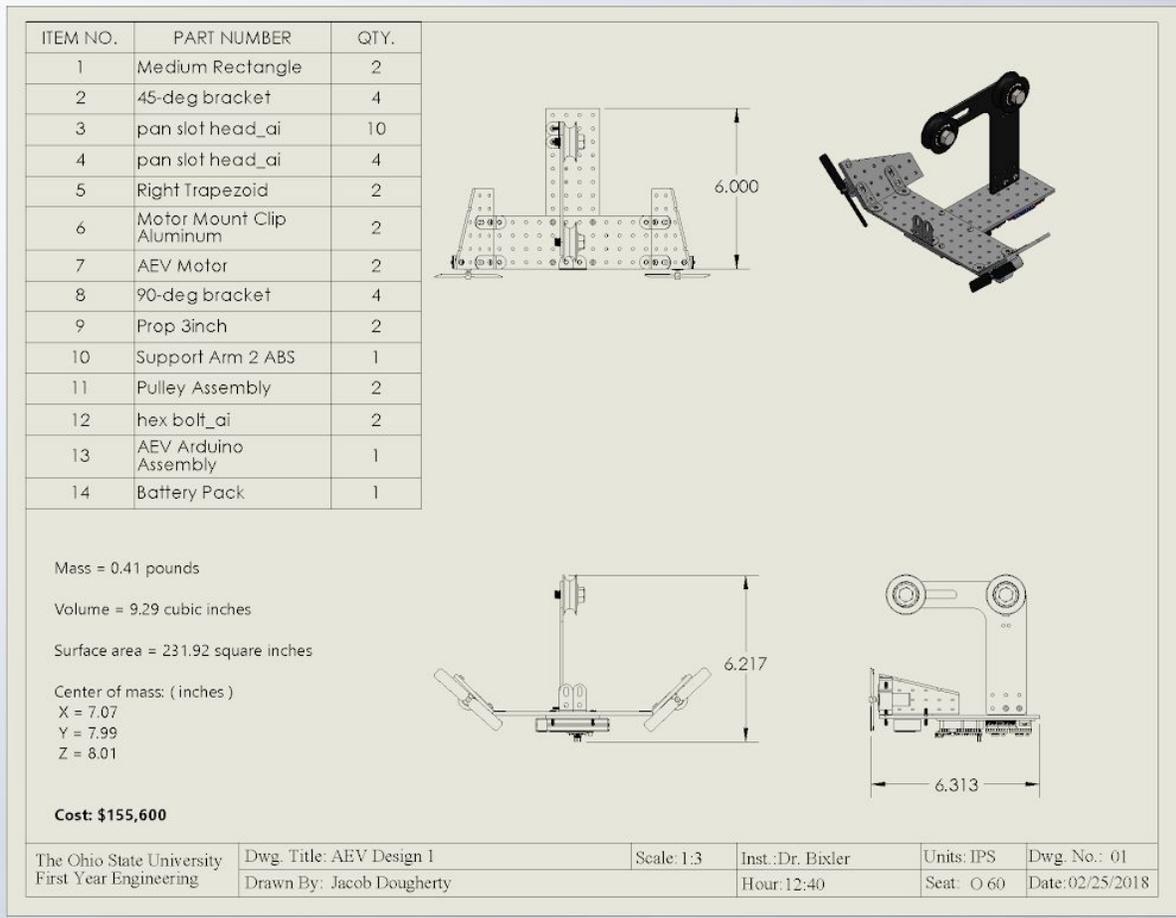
Solidworks Drawing Design (By Jacob and Zhang, Prototype 01)
